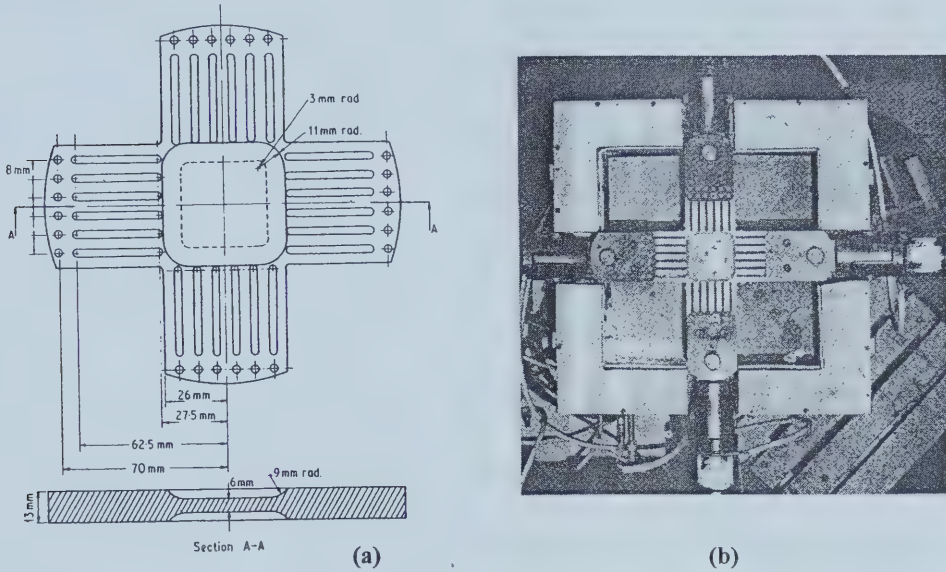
(a) Specimen, and (b) test equipment used (Kelly [45]).
